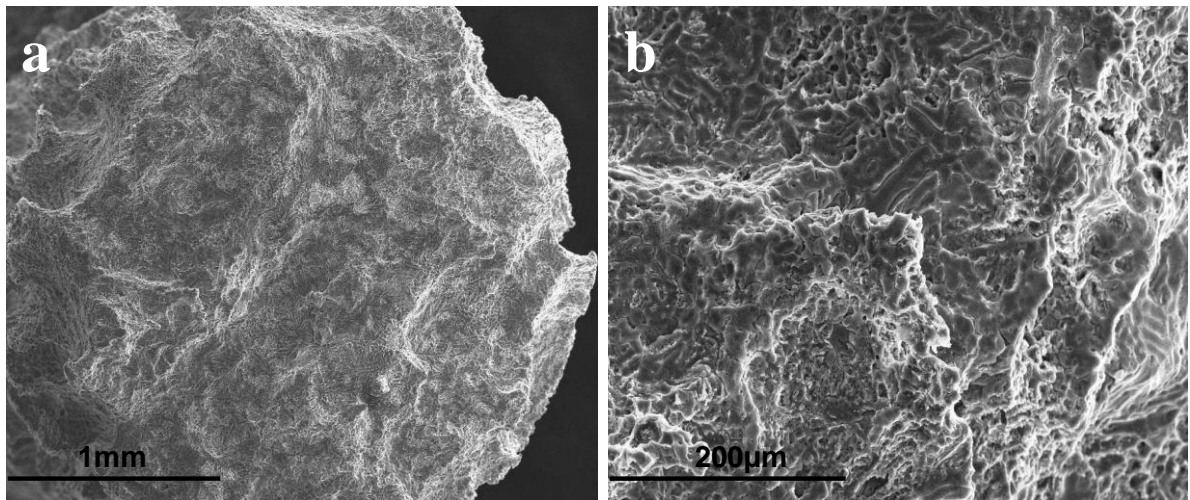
Typical fractograph of the Mg3Zn1Ca alloy tested in air: (a) overall fracture surface and (b) fracture surface showing dimples as the primary feature
